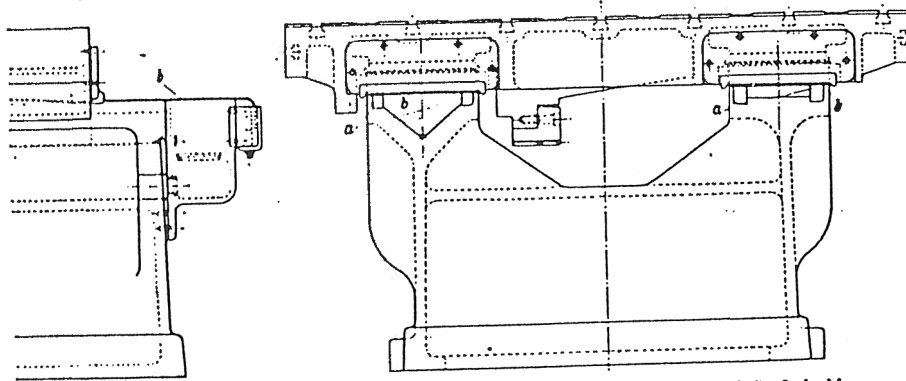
Protected slideway for a grinding machine table (The Churchill Machine Tool Co. Ltd., Manchester). a—Oil channels; b—Protective cover.
